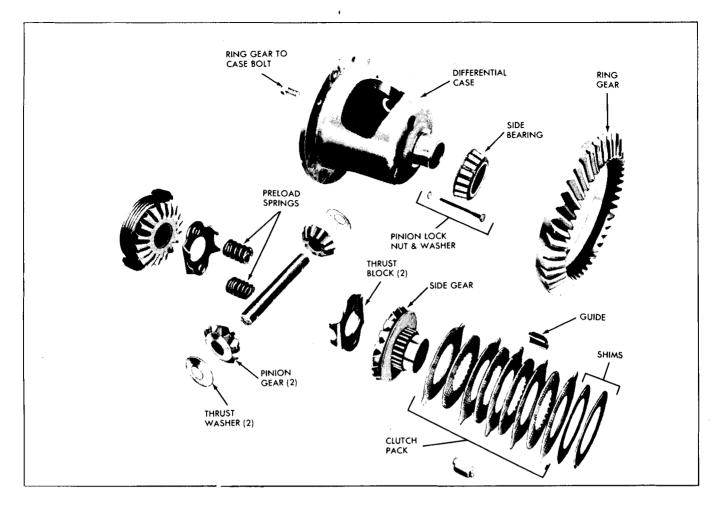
B-1 Exploded View of Safe-T-Track - B Series - "O" Axle
